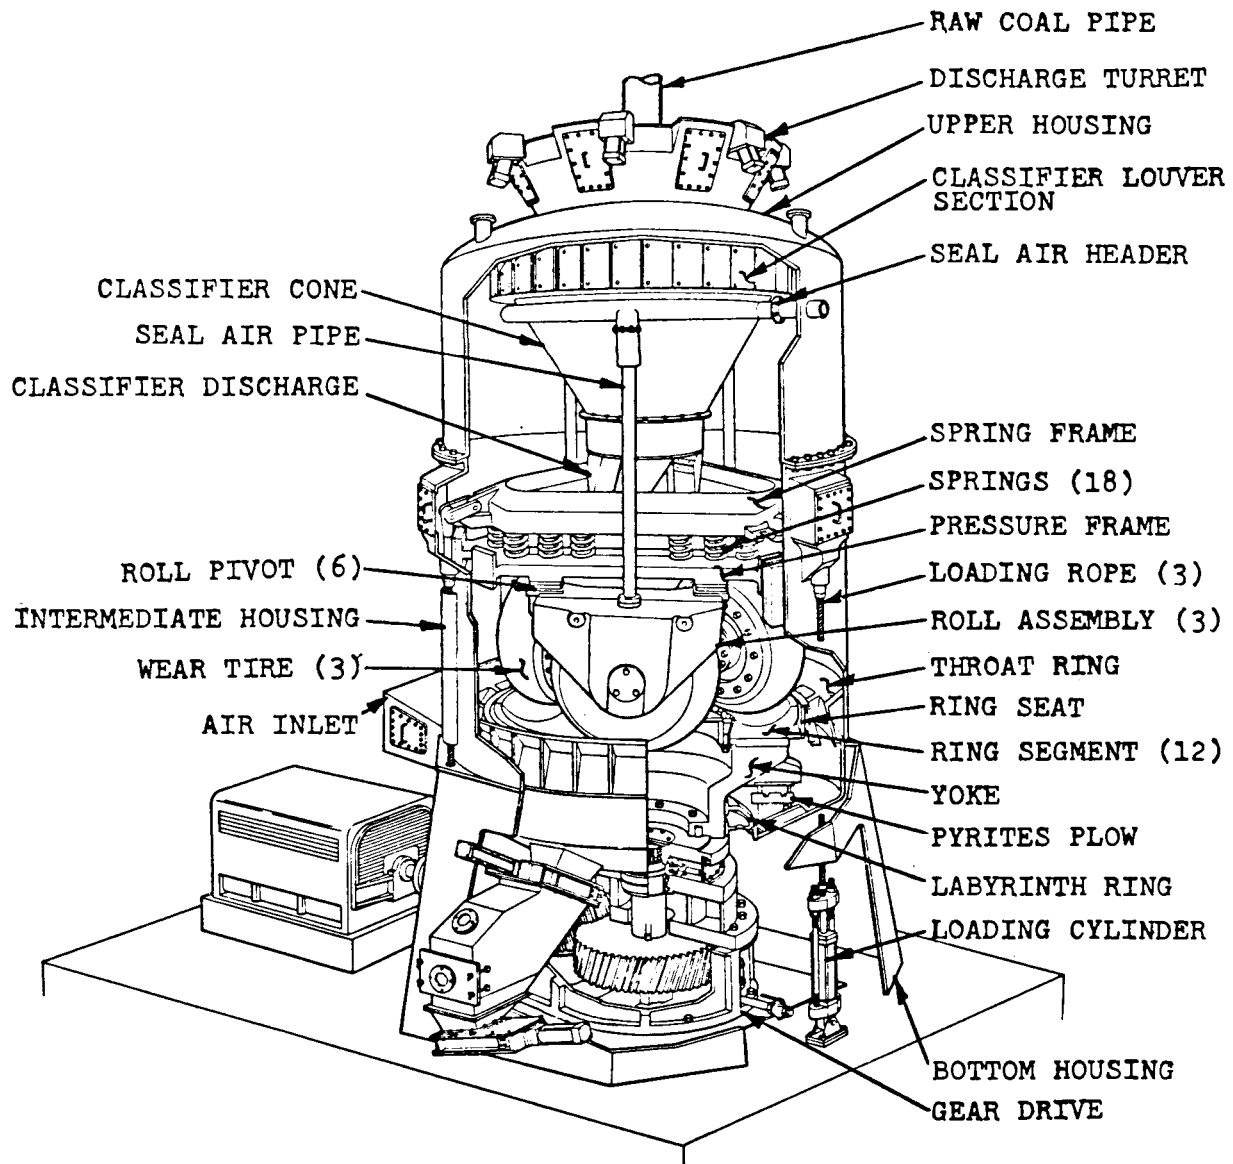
Roll-Race Mill (Part Location Drawing)
